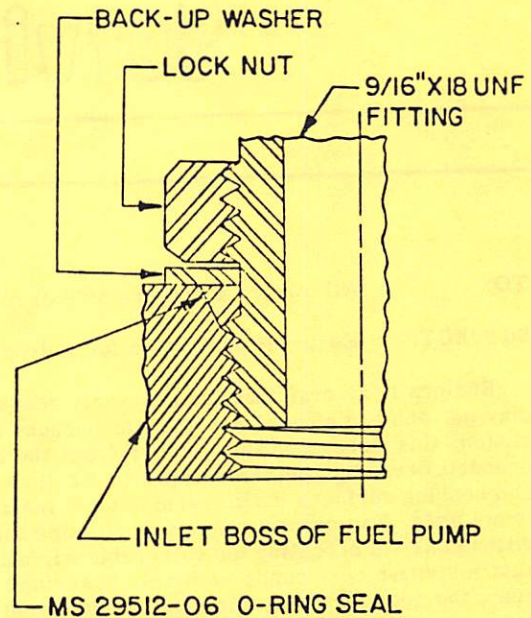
Section Thru Inlet Boss Showing Correct Location of O-Ring Seal and Back-Up Washer
